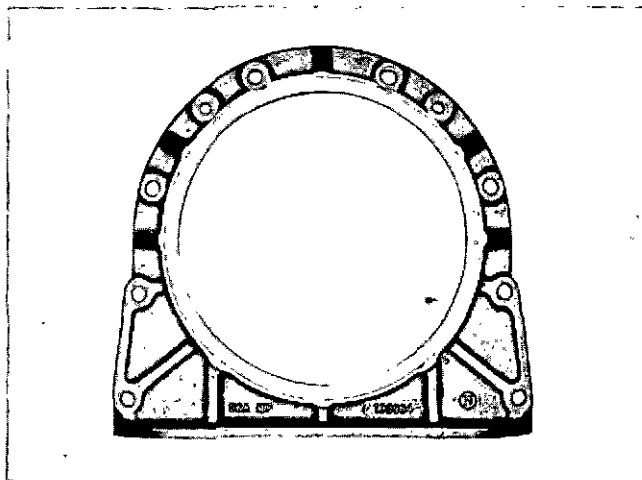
, V40168. Rear cover (oil seal type)
